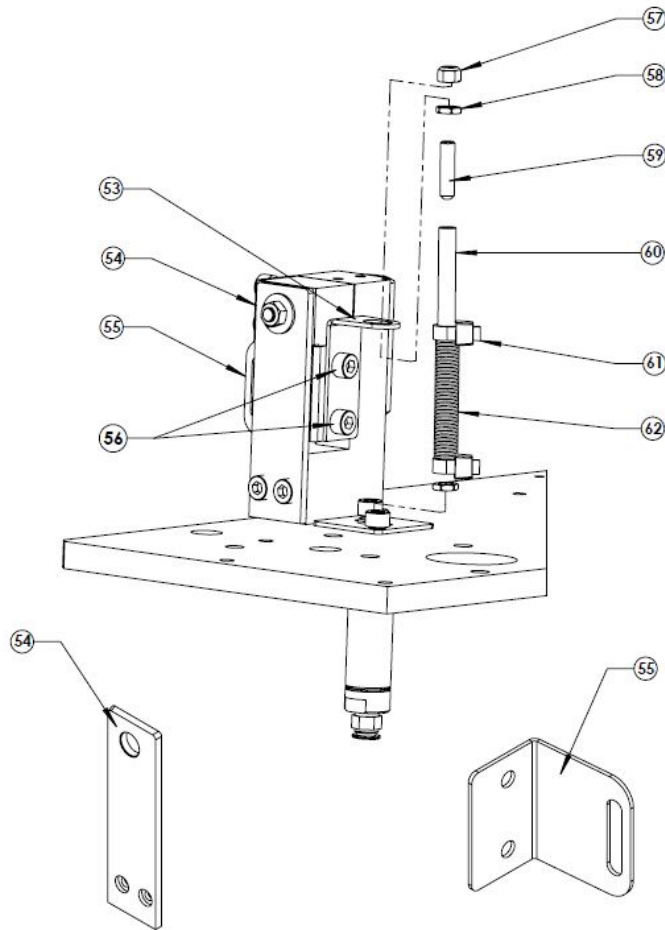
SPA 47292 Dynamic Knife Actuation Spring Assembly
